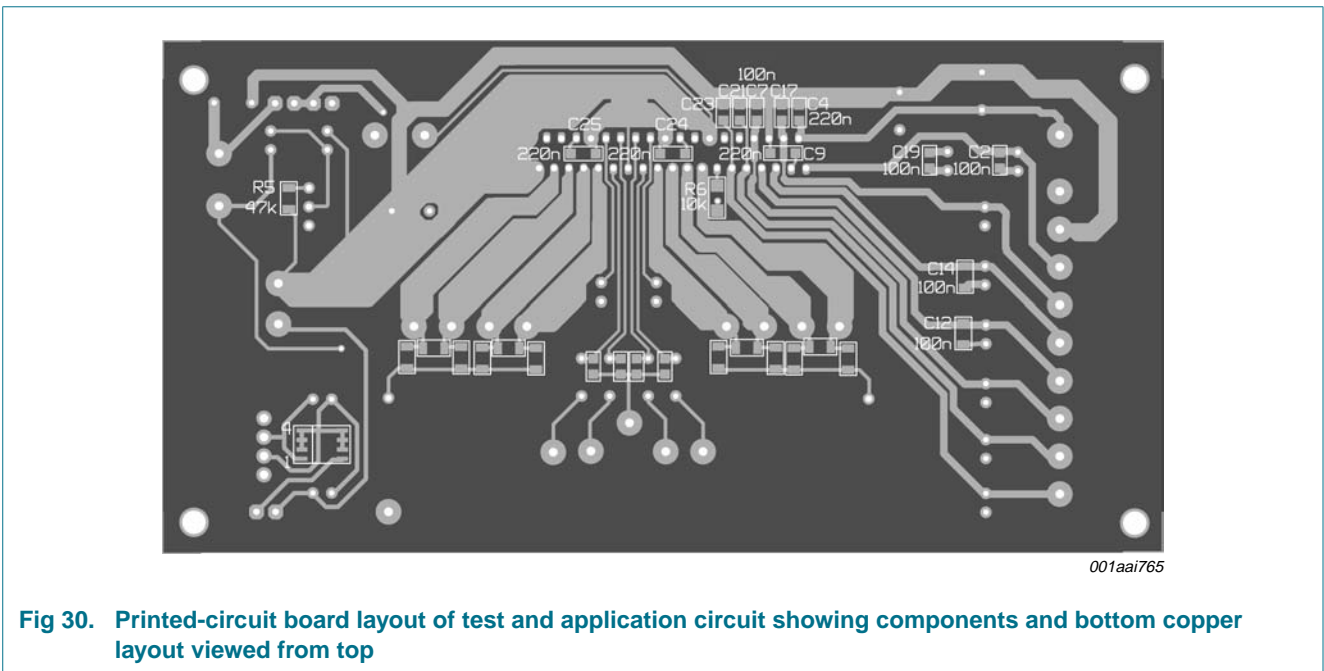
Printed-circuit board layout of test and application circuit showing components and bottom copper layout viewed from top
